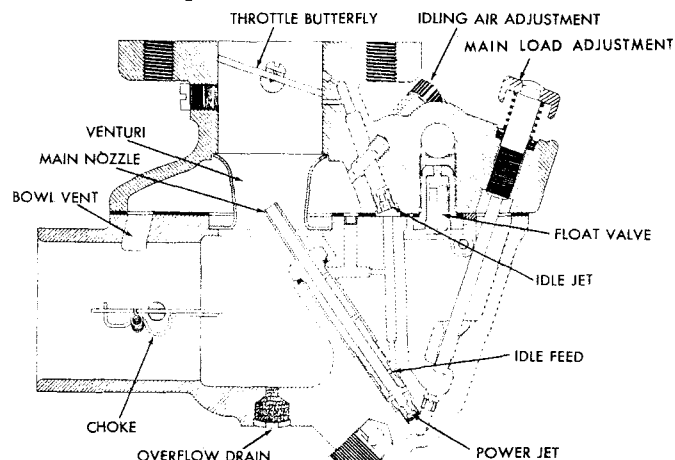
Sectional View of the Marvel-Schebler Carburetor
